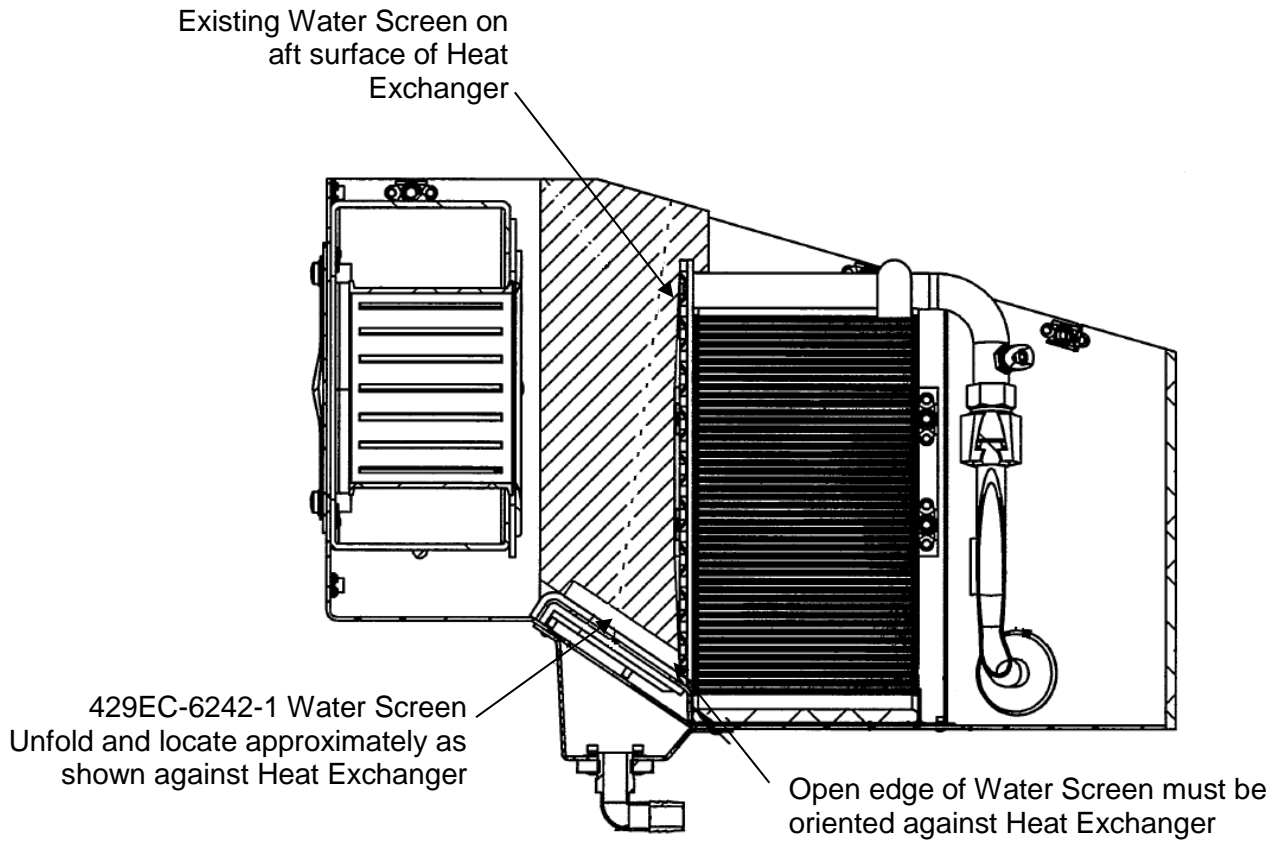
Aft Evaporator section shown with 429EC-6242-1 Water Screen Assembly installed
